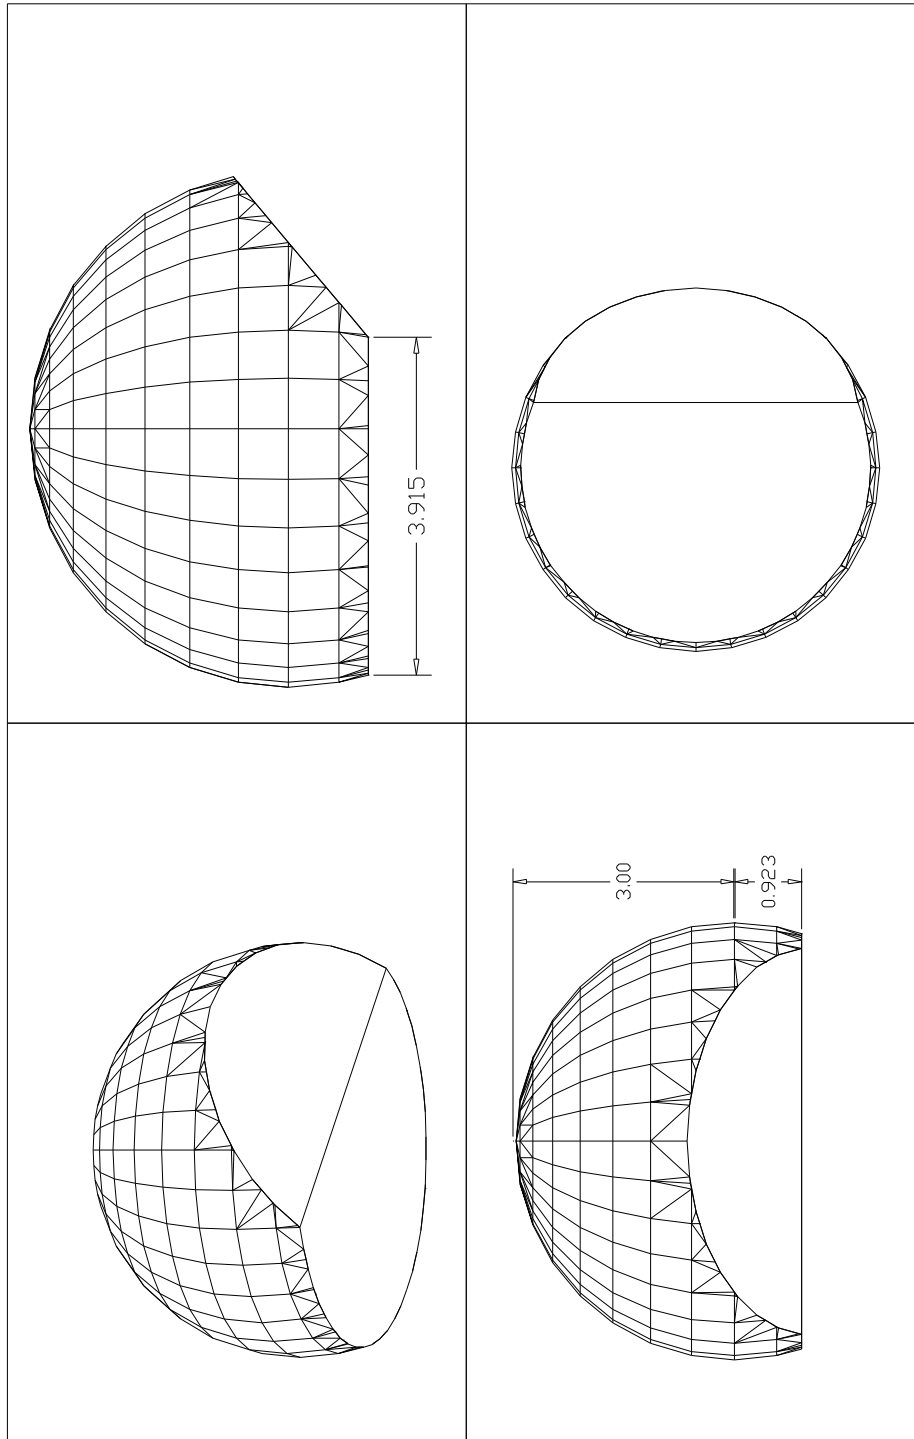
Dimensioned Silicon hyperhemispherical lens. Dimensions are in millimeters.
